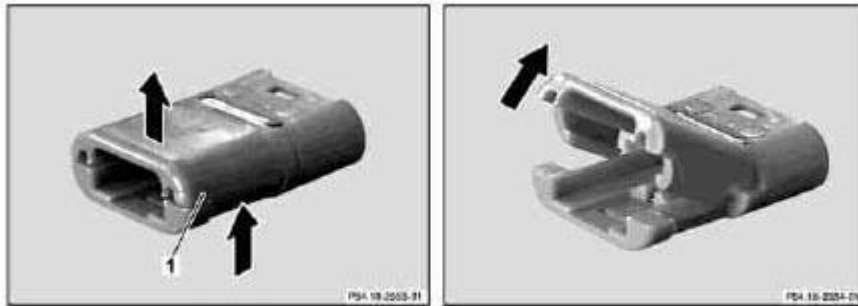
Pressing Slide Valve Out Of Last Detent - Shown On A 4-Pin RK 2.5 Solder Contact Plug
